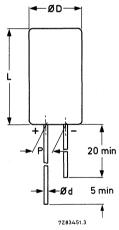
Style 1; see Table 1 for dimensions d, D, L and P.
